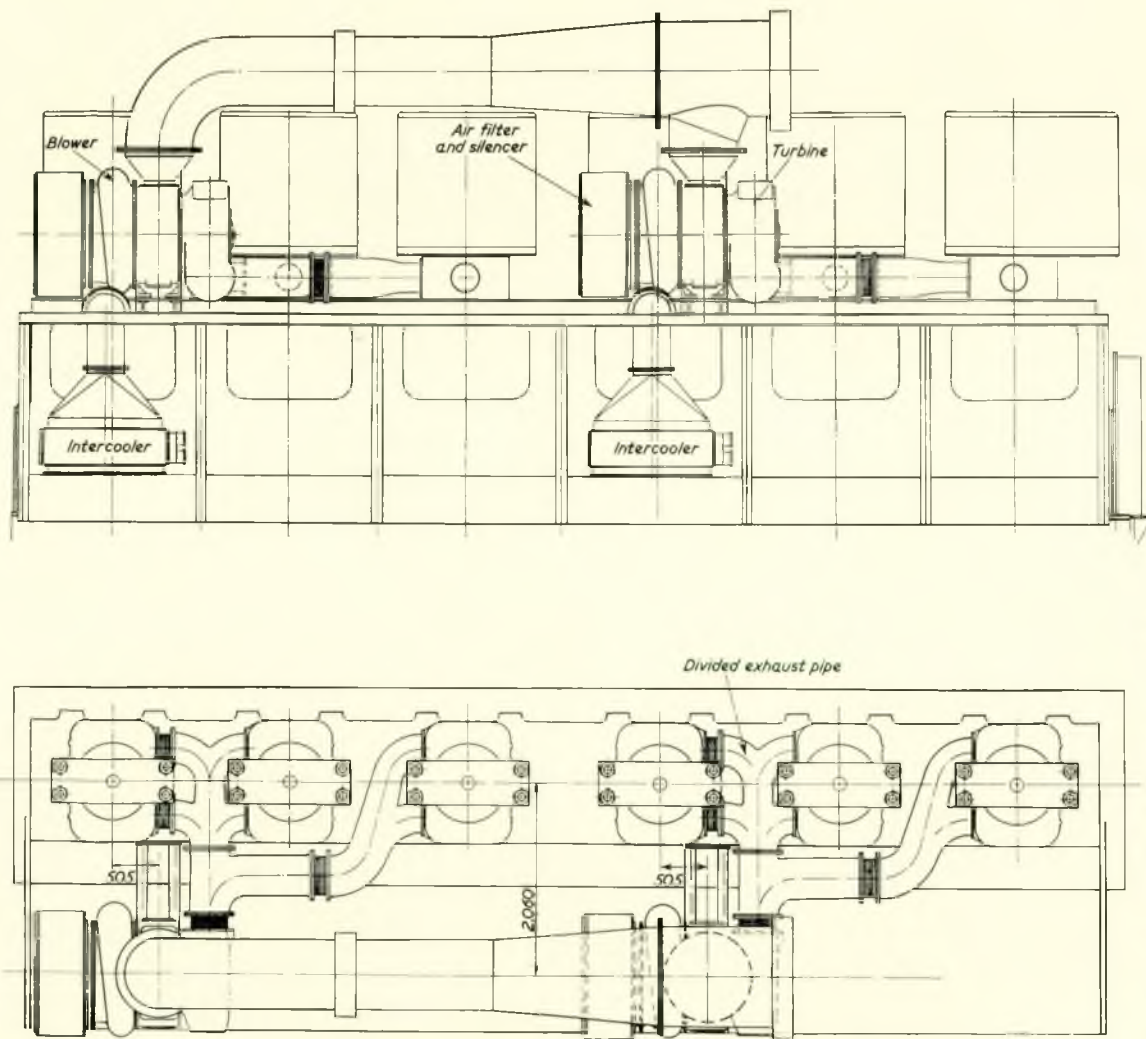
Arrangement of the six cylinder engine with two turboblowers
